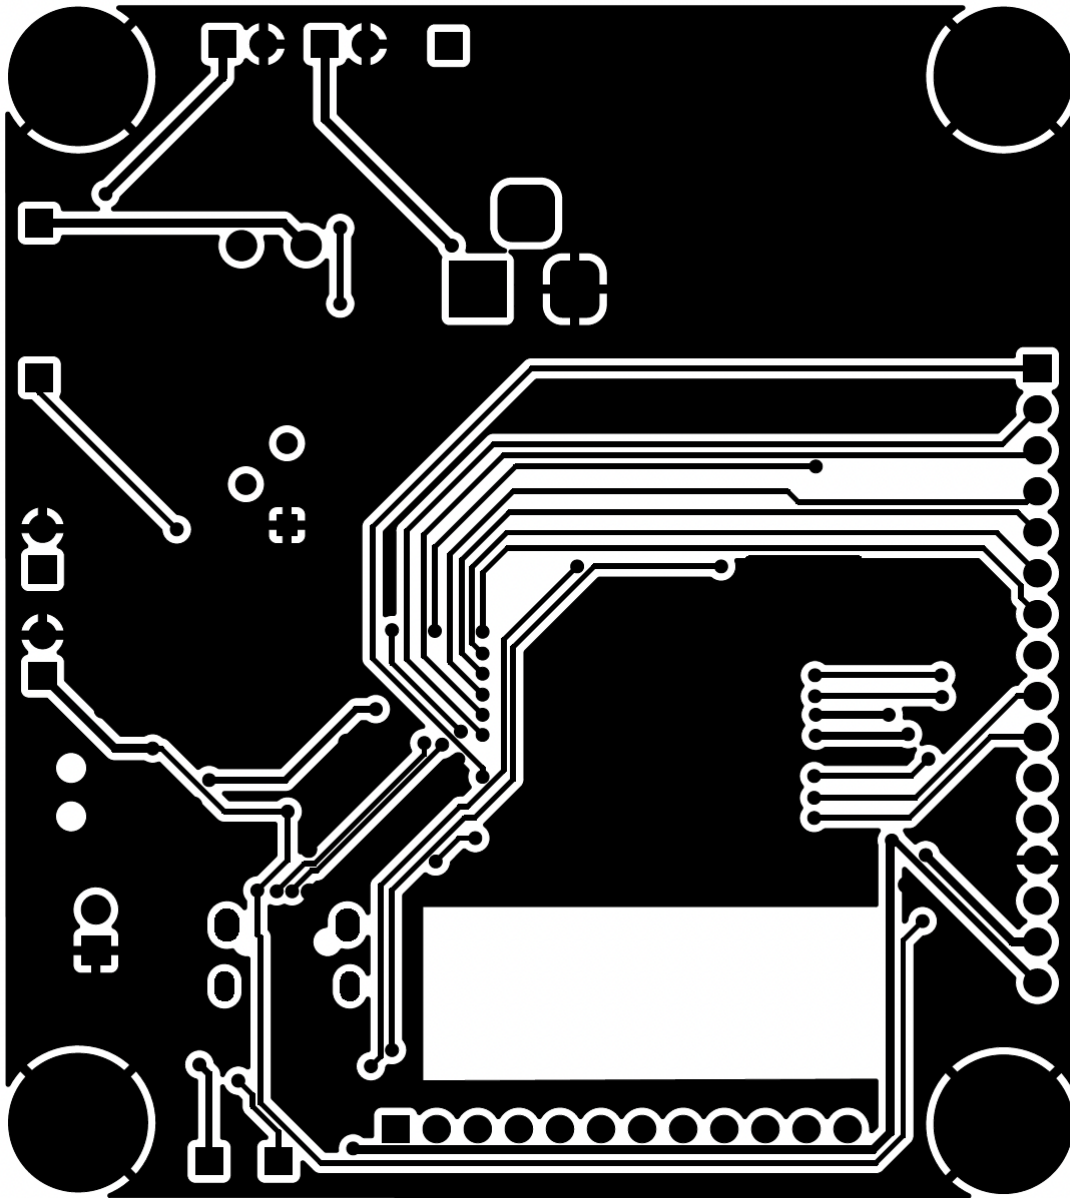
PCB Front Layer, +12V Plane
